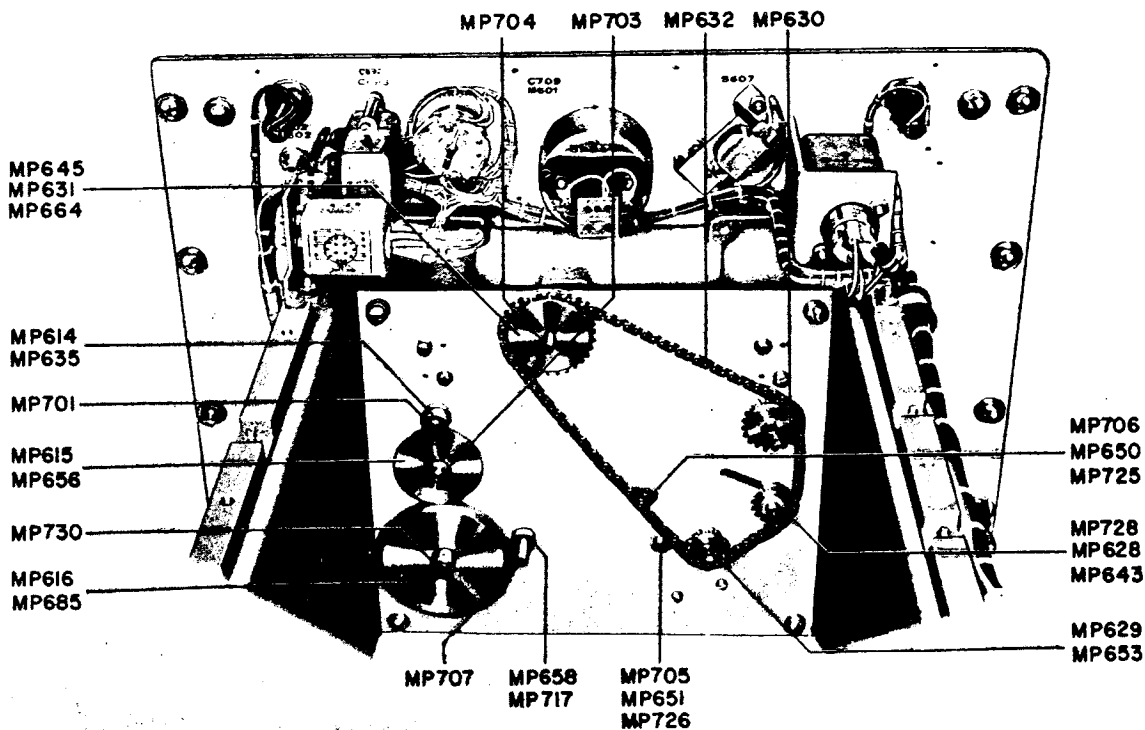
Electrical Frequency Control C-2861/WRT-1, Location of Parts on Back Plate of Gear Box
